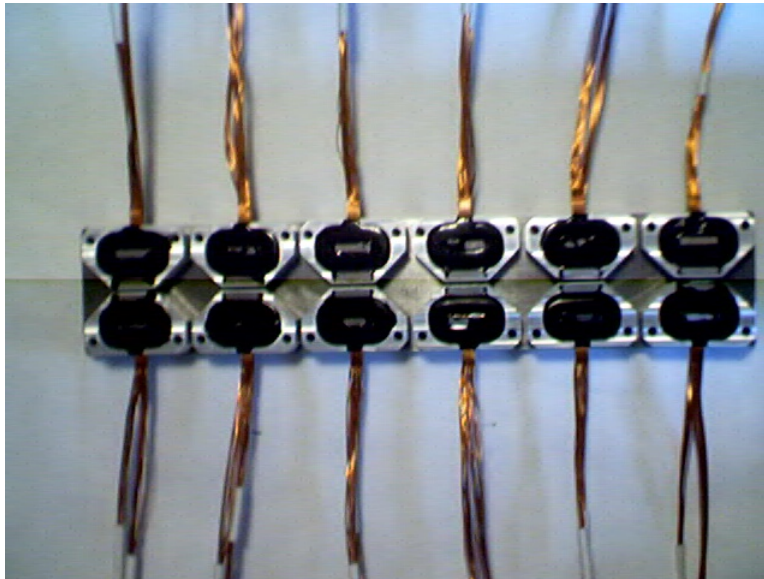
The potted actuator halves installed on a fixture plate ready for grinding. Photo courtesy of Fred Sommerhalter.
